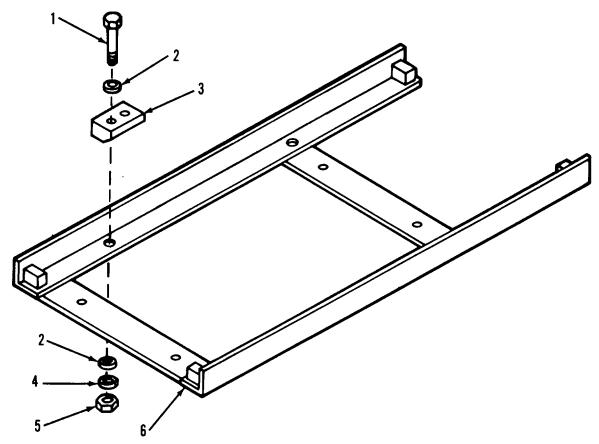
M284 Smoke Generator Mounting Kit (Fuel Tank Mount and Fuel Lid Assembly).
